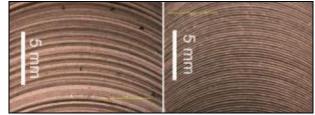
Top view of two different weld made by FSW, on the left rougher surface texture obtained when thicker workpiece welded, and on the right smoother surface texture produced with thinner workpiece as Edwards & Ramulu presented in their study [100].
